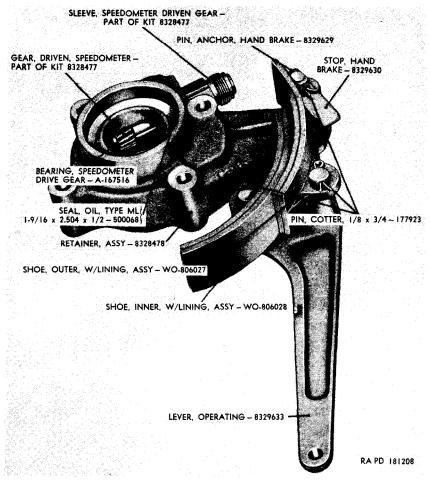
Transfer rear axle output shaft retainer with bearing assembly.
